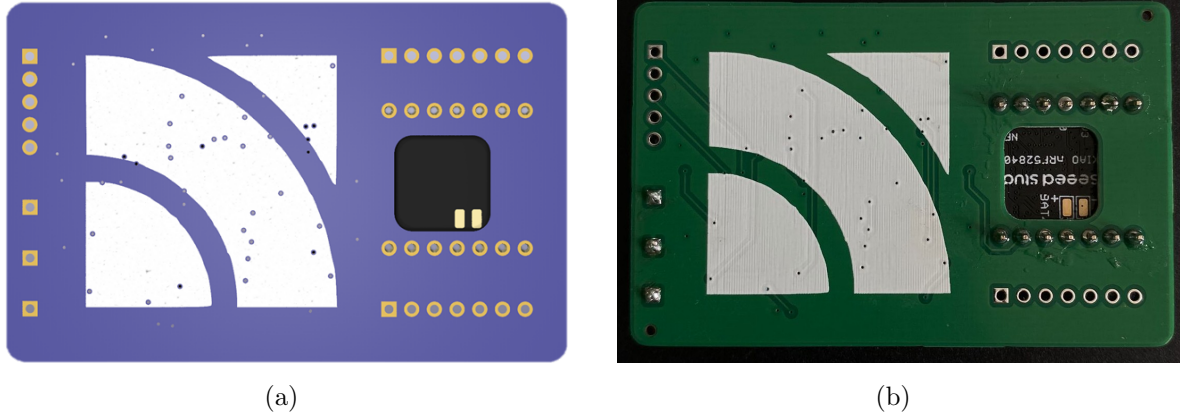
Top (b) and bottom (a) views of the manufactured OEET controller PCB.
